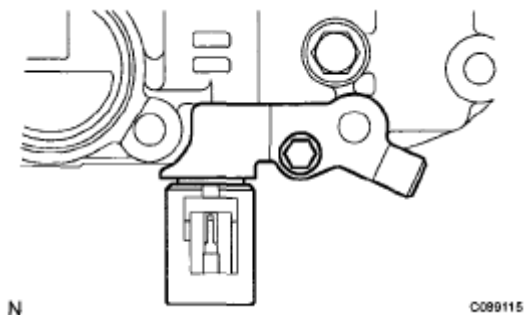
Identifying Shift Solenoid Valve SL1 Bolt
